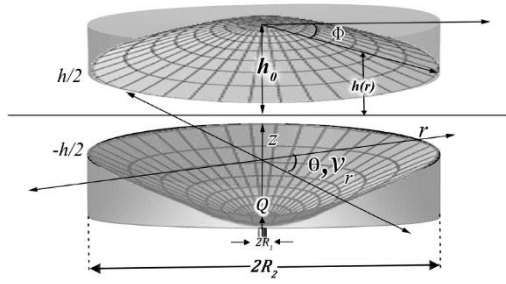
Geometry of an Externally Pressurized Convergent Thrust Bearing.
